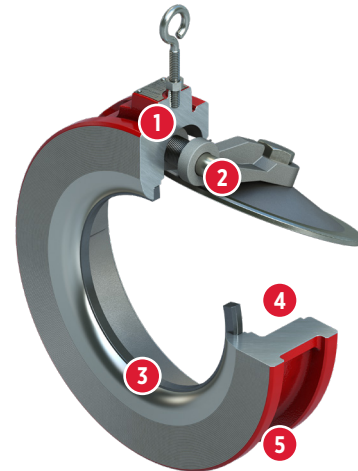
Seat Ring Hard Seat Cutaway Rear View.
